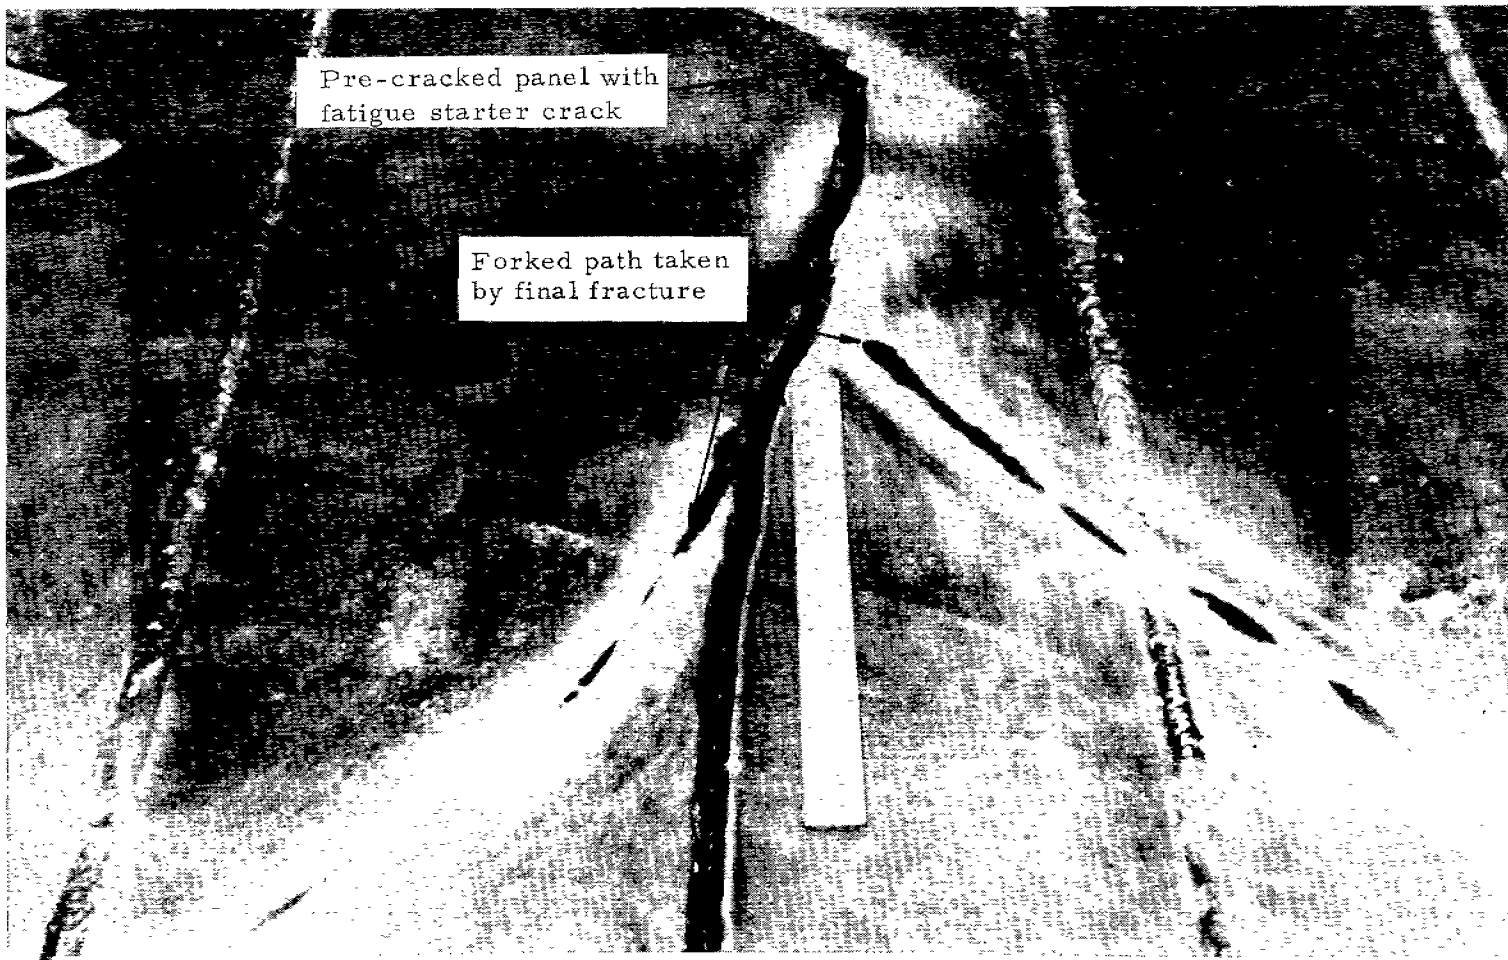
General View Of The Fracture - Test A9; Configuration: Fatigue Crack Initiator Generated At The End Of A 5" Edge Slot; Test Temperature: +45°F; Fracture Stress: 34,700 Psi On The Gross Section; 36,500 Psi Avg. On The Net.
